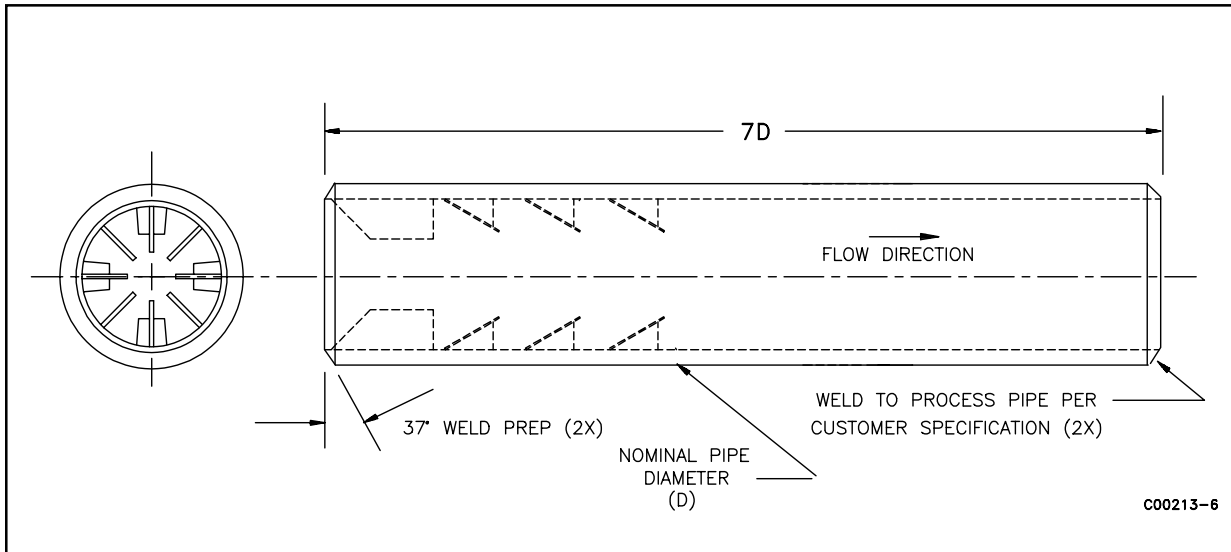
Typical Butt Weld Mounting of a VMR
